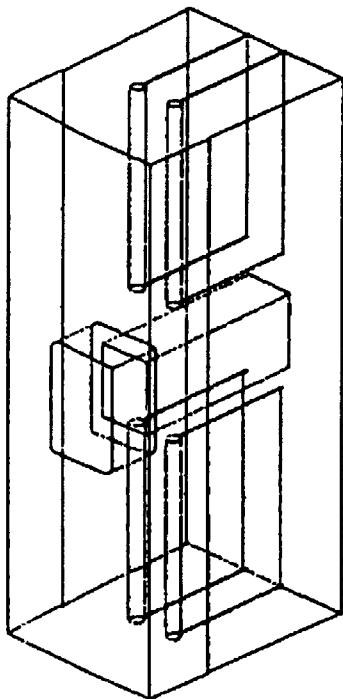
(7) Machining of outer surface prepare EB welding of SB
